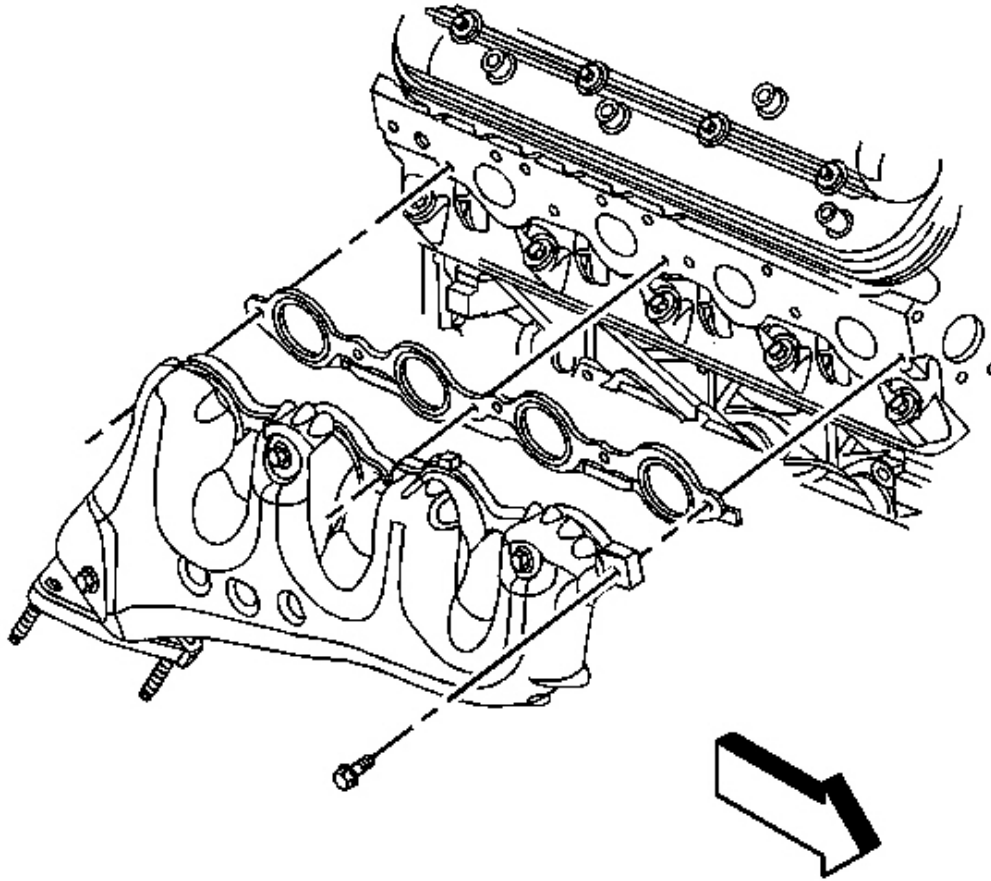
View Of Right Exhaust Manifold - 5.3L
